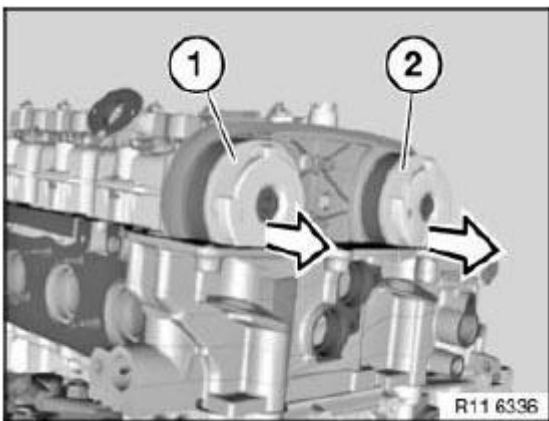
Identifying Inlet/Exhaust Adjustment Unit
